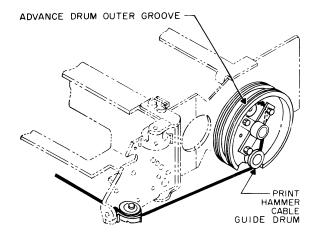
Print Hammer Cable Installation, Securing Cable to Advance Drum
